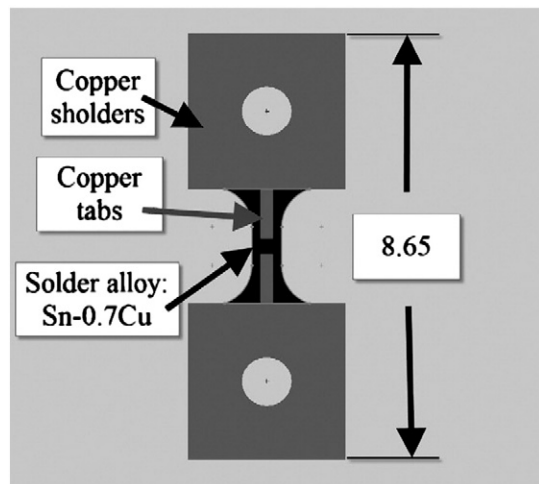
A sketch of the miniature Sn–0.7Cu soldered specimen. [87].
